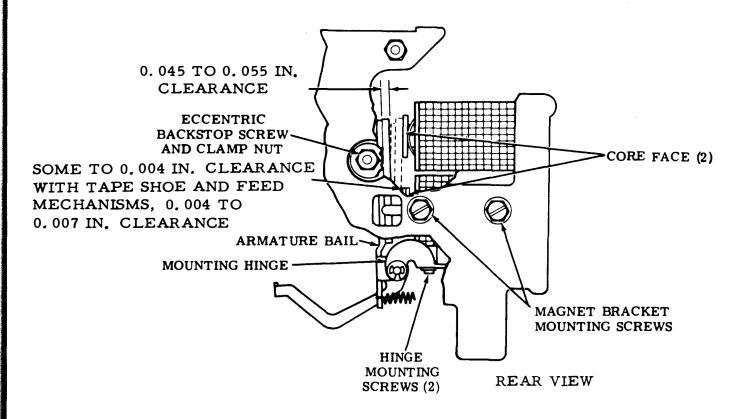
Clutch Magnet Assembly (Preliminary) (Core Clearance and Armature Bail Clearance)
